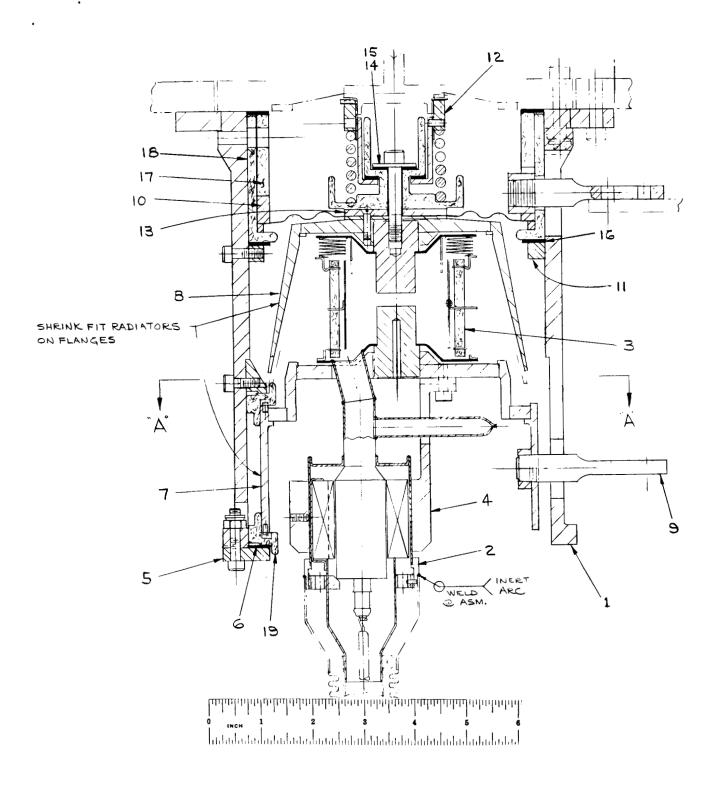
Layout of Vacuum Interrupter for AC Circuit Breaker.
